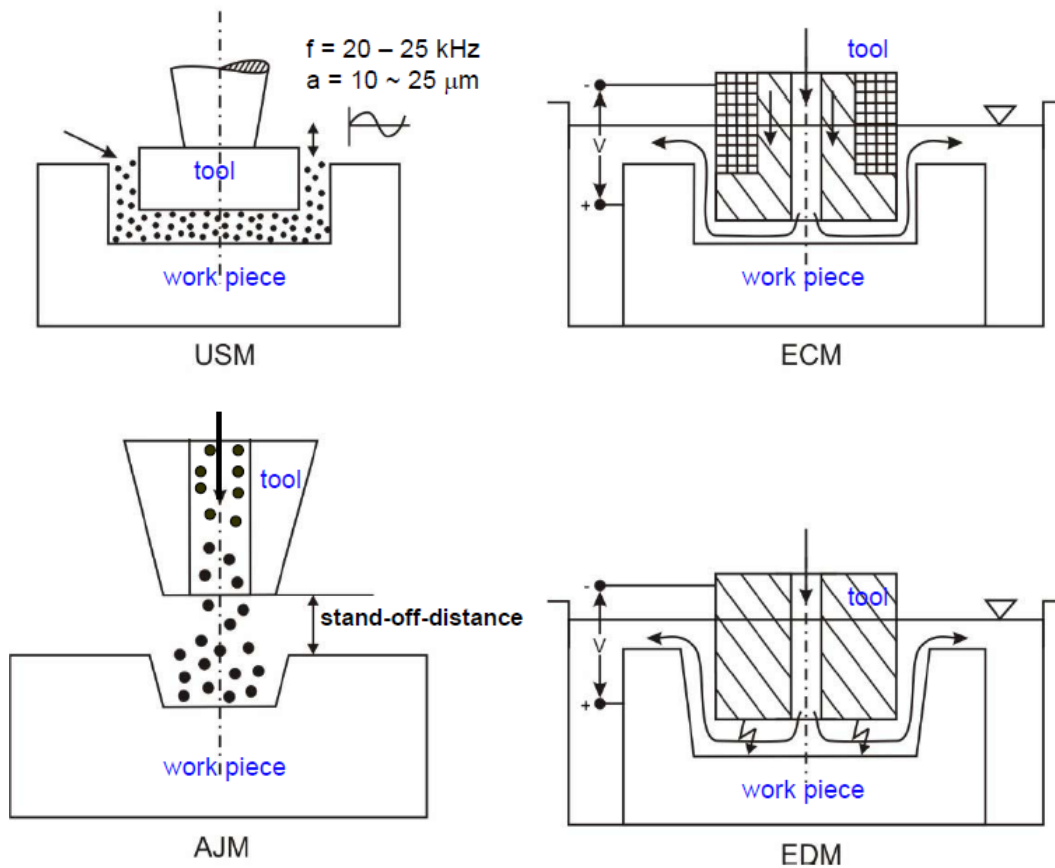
No physical contact between the tool and workpiece (Kharagpur, n.d.)
